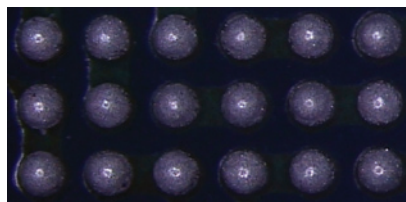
Bottom View of 0.5mm Pitch BGA Package After Dipping in PoP Paste Indium5.79
